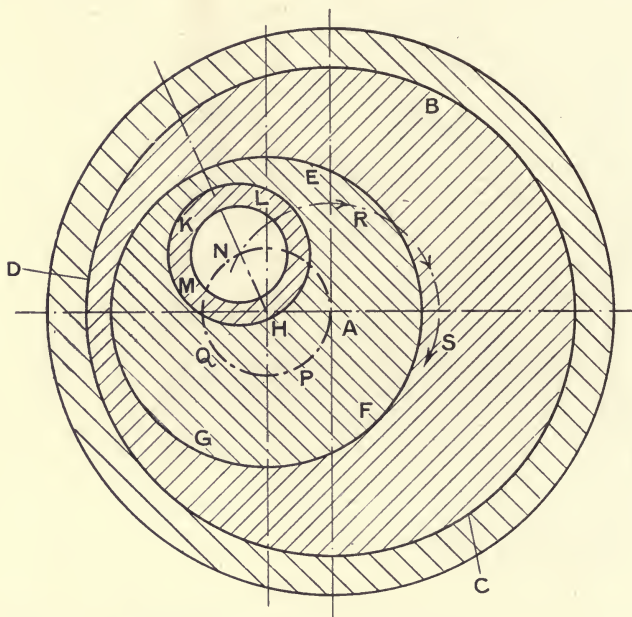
CONSTRUCTION OF WHEEL HEAD OF CYLINDER GRINDER
